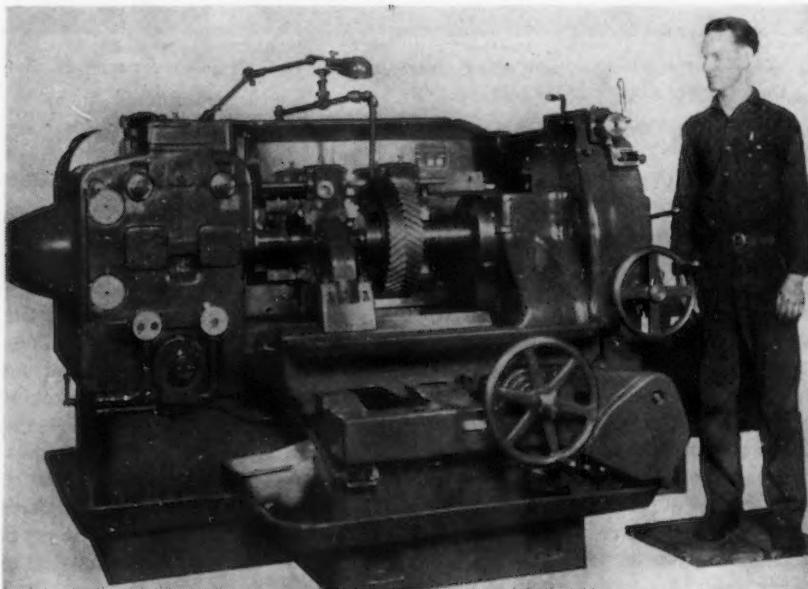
New model Sykes gear generating machine, the No. 2-C.
